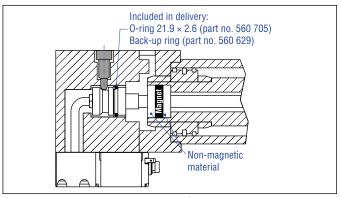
Mounting example of pressure fit flange »S« and sensor electronics with bottom cable entry
